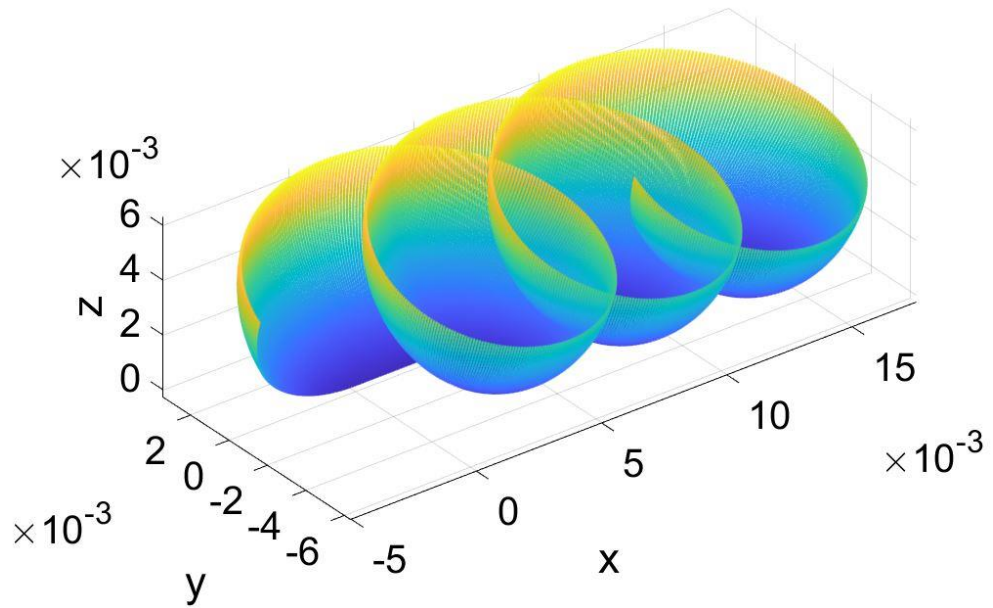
Overall 3D view of a cutting model with one cutting edge and tilt angle applied (dimension in m)
